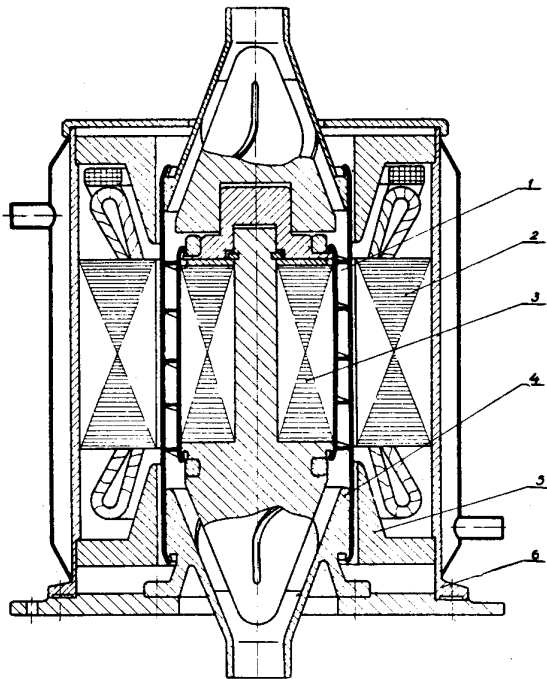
Schematic view of pump construction: 1) working section, 2) stator, 3) core, 4) cone with vanes, 5) copper collar, 6) body.
